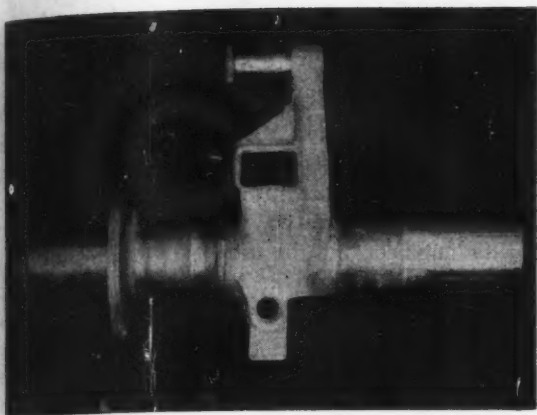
Rear-axle housing tube for 9-ton armored car, composed of steel tubing, a static casting and a centrifugal casting
